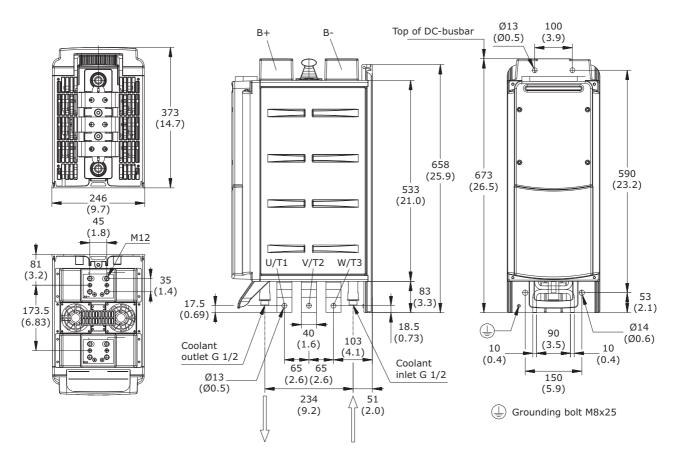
NXA 0502 6 (CH62) dimensions in mm (inch)
